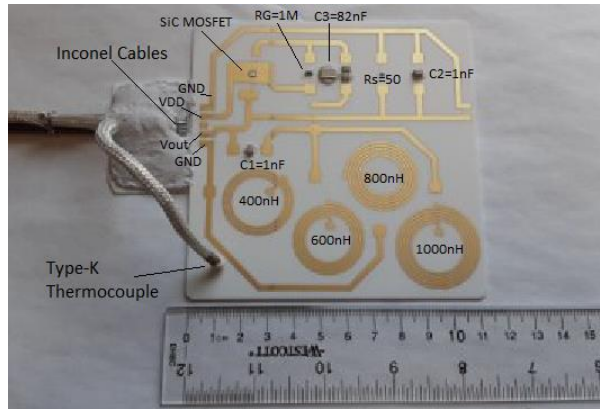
Fabricated oscillator circuit (Alpha) with Inconel cables and thermocouple placement.
